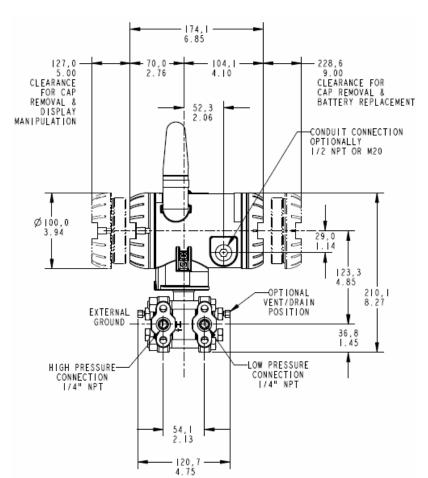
Typical mounting dimensions for STDW924, STDW930 and STDW974 (side view)
